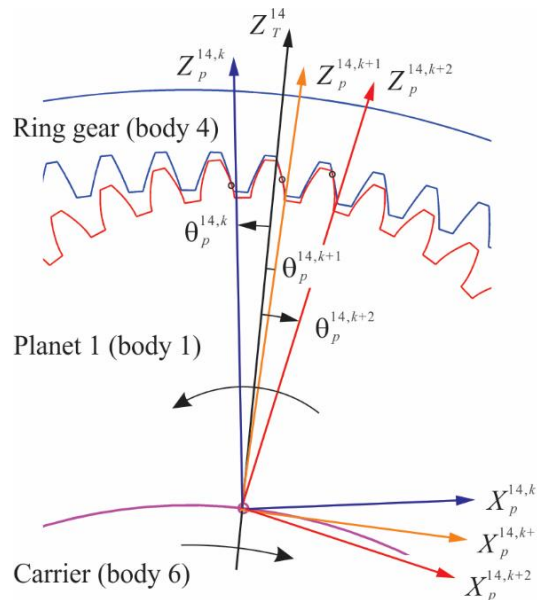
Tooth profile coordinate system of planet and ring gears
